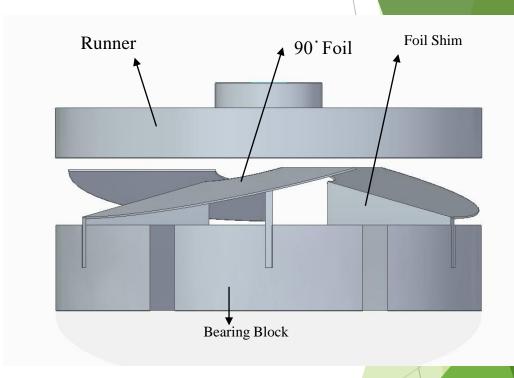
3D CAD Model Assembly of Bearing Block, Runner and 90 Degree Sector angle Foils
